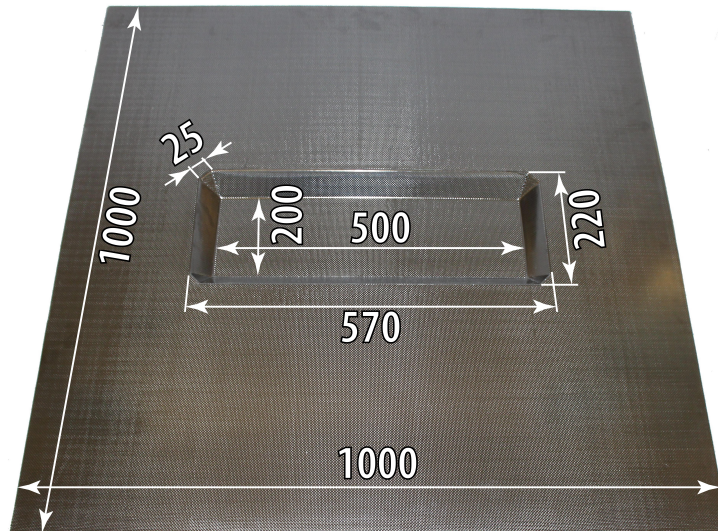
Finished part with added dimensions. All dimensions in millimeter. ©2016 IEEE, reprinted with permission from [6].
